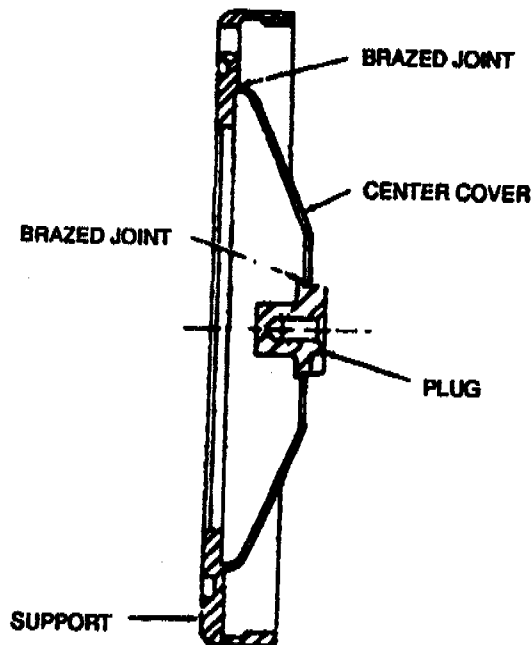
Rear Bearing Cover Crack and Damage Inspection.
